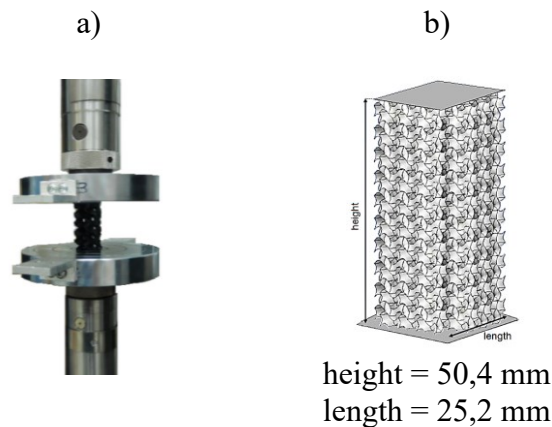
Compression test setup a); specimen shape and dimensions b).
